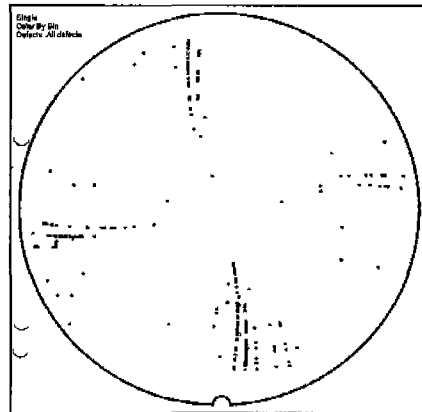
Residual wheel pattern of polished wafer. (Surface scanning inspection system, WIS CR80, ADE Co. USA)
